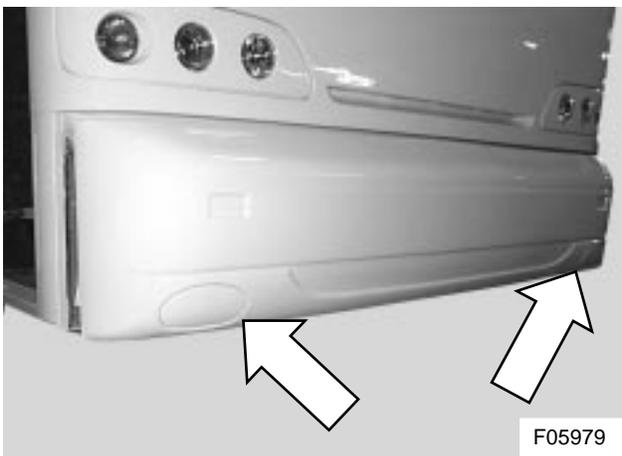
Lamp recess plug flush with bumper skin (C2045)
